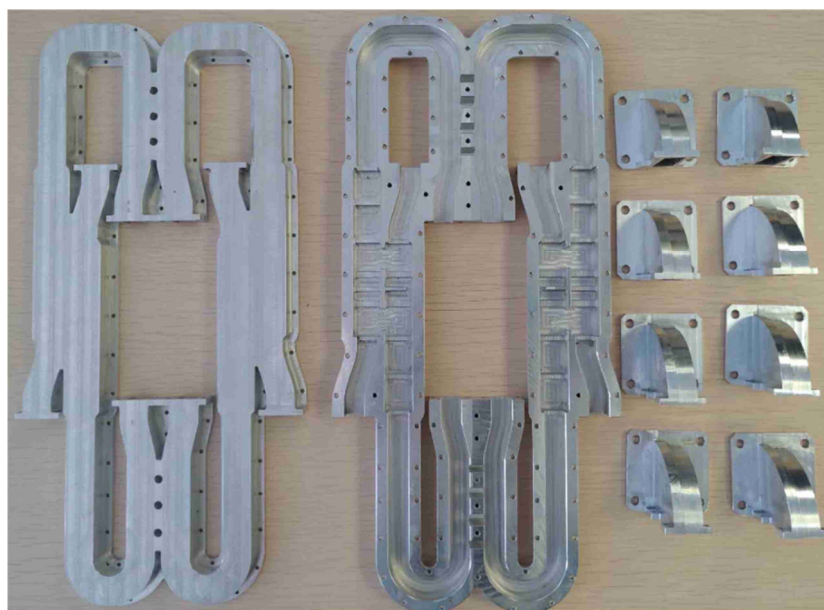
Fabricated SPJ by CNC machining, shown as separate parts.
